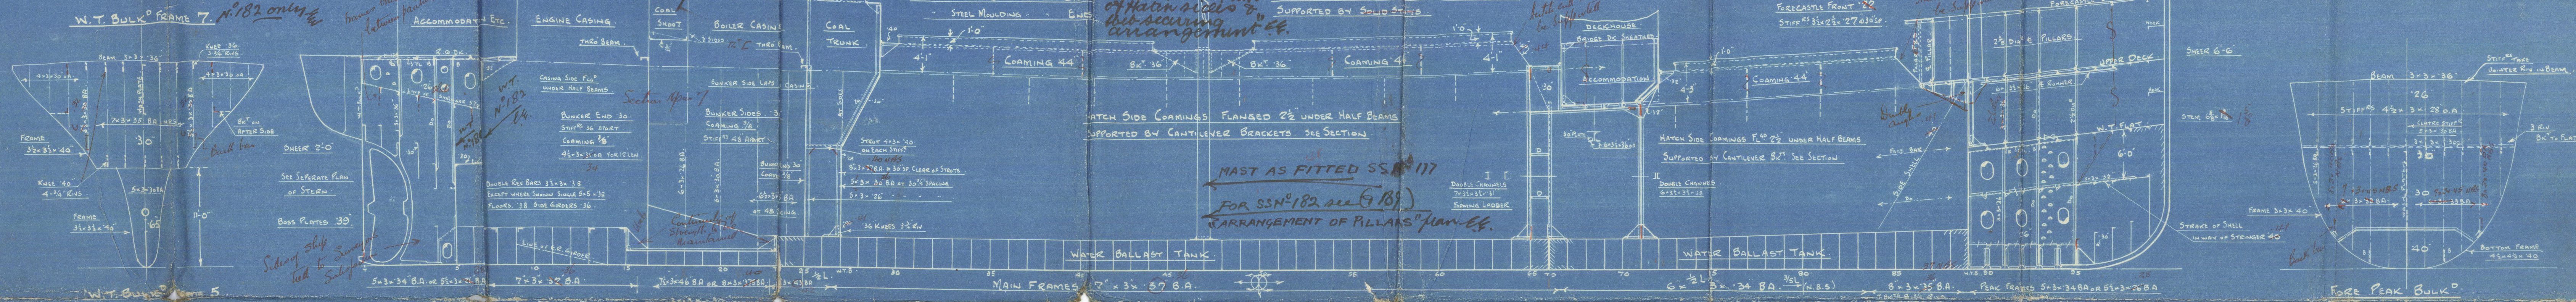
DETAIL OF BRIDGE FRONT CONNECTIONS N° 177.
